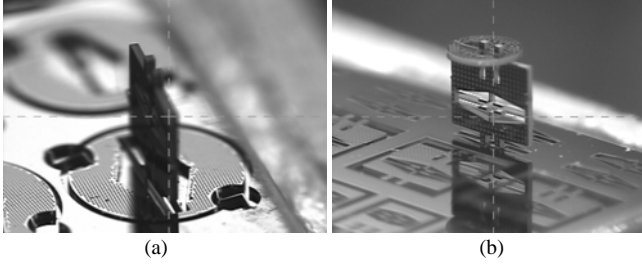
(a) & (b) Micro part assembled onto the compliant snap fastener, (a) Microassembly with snap fastener on a wheel, (b) Multilayer assembly with snap fastener and modular part.
